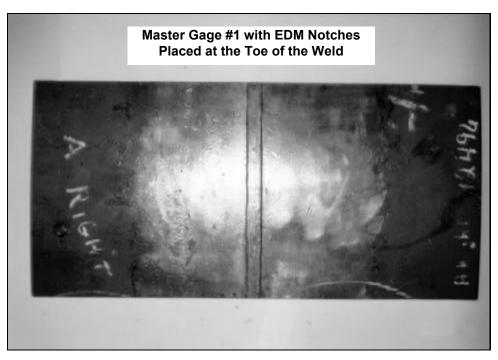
Master Gage Constructed of Tank Car Material Representative of ASTM A515, Grade 70 Steel
